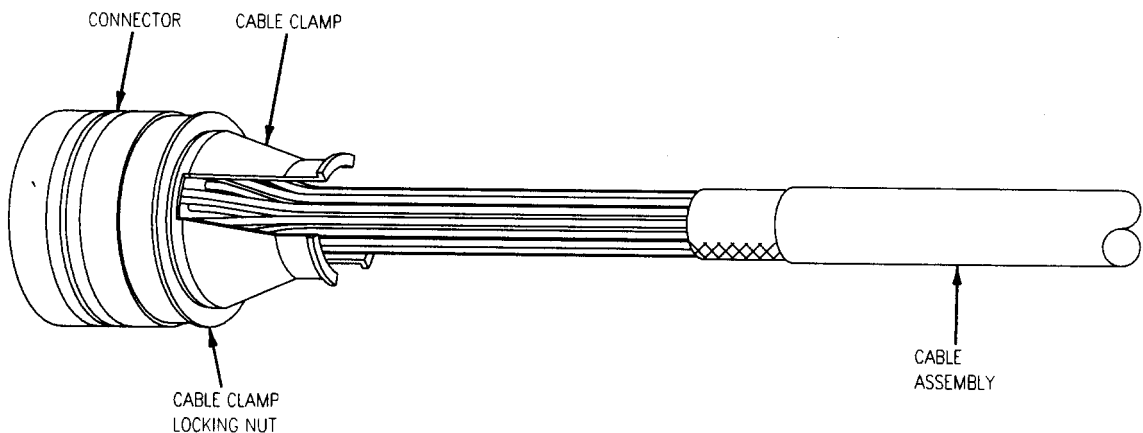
Installing EMI Cable Clamp and EMI Cable Clamp Locking Nut
